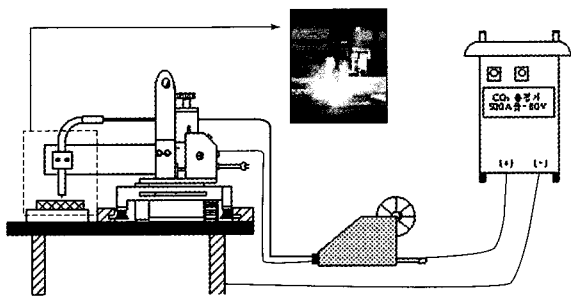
View of CO₂ welding used auto-carriage
